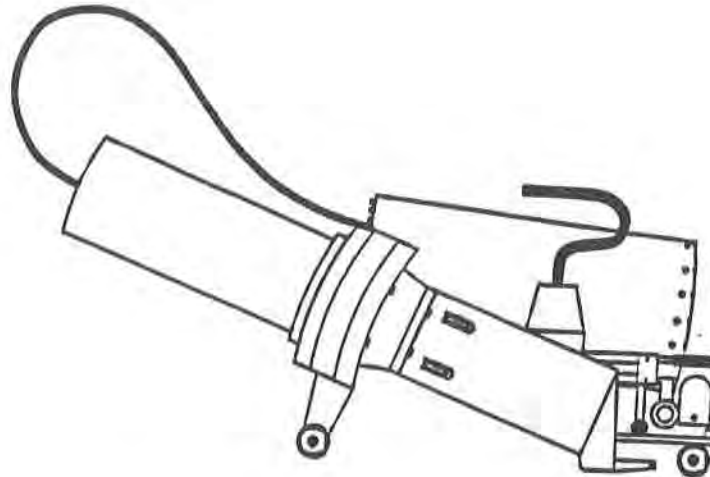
Typical Hot Air Welding Apparatus
